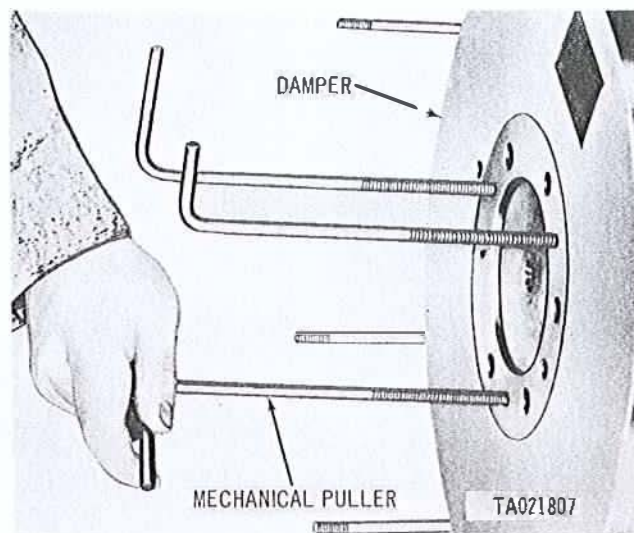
Removing crankshaft torsional vibration damper using mechanical pullers.
